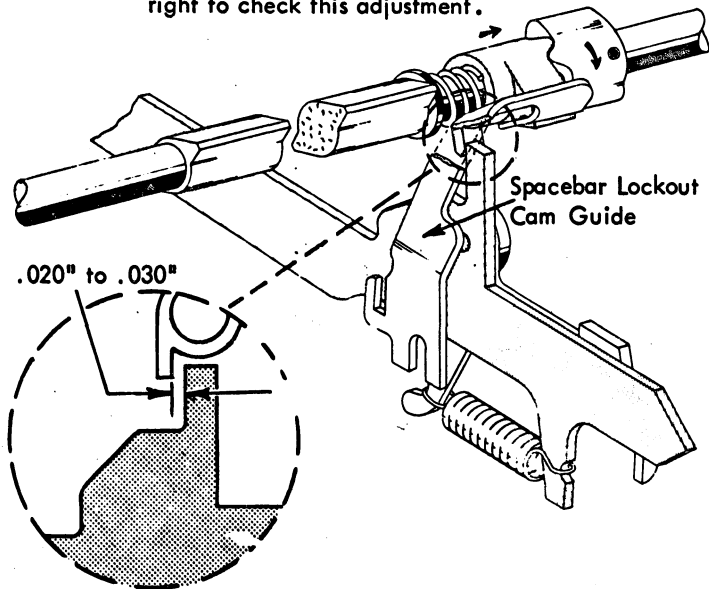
Spacebar Lockout Cam Guide Adjustment
